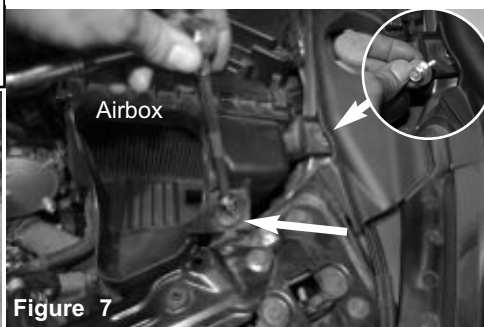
For both Driver and Passenger side, loosen the 2 bolts holding in the airbox. Loosen using 10mm socket or wrench.
